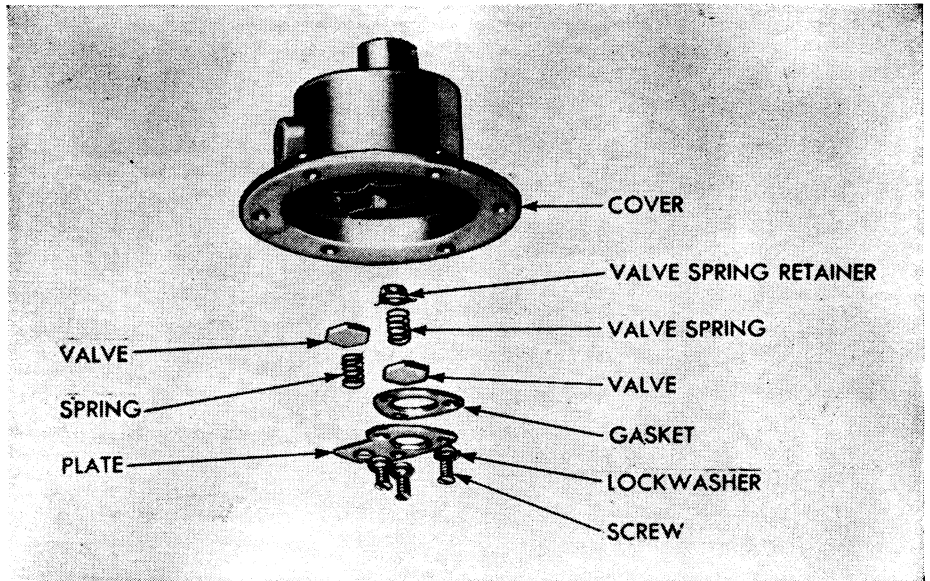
Series R. If pump being serviced has separate valve parts, assemble in sequence shown
